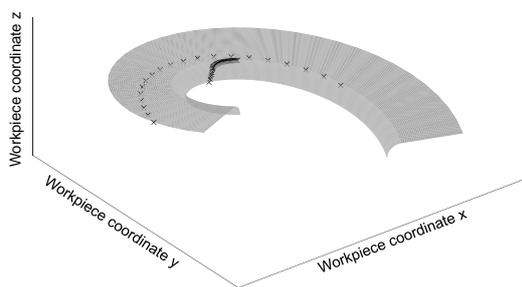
Contact points between cutting tool and workpiece on a straight sided flank and adjacent fillet for synchronized whirling.
